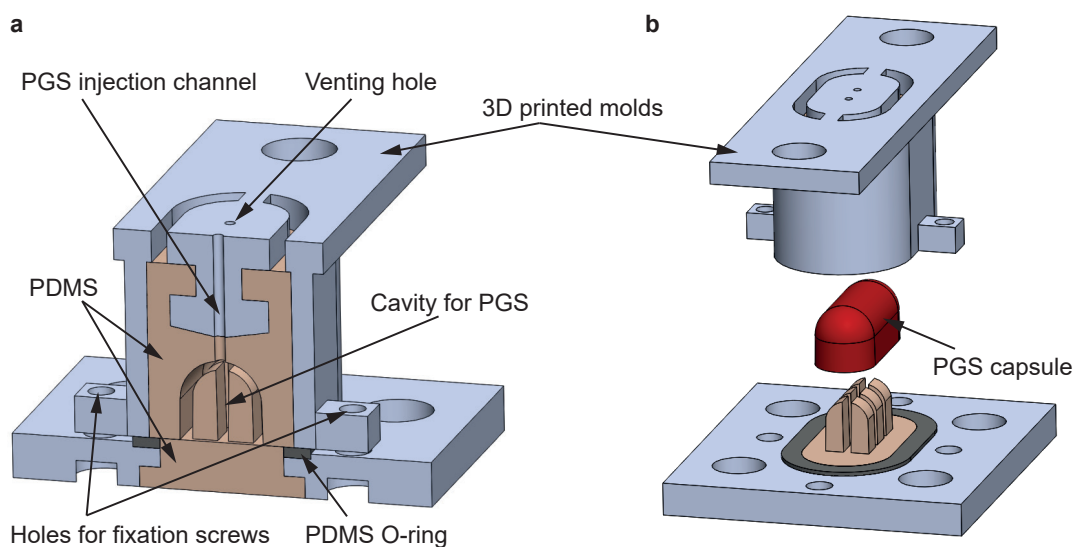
New mold design. a,b, Injection molding of PGS or POMaC in the new hybrid molds design. Hybrid molds before filling them with PGS showing the molding cavity (a), and after the opening of the molds at the end of the process (b).
